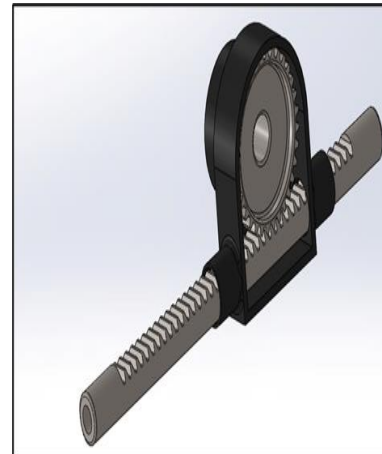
CAD design of rack and pinion (Rack and pinion is a type of steering gear that is commonly used in modern vehicles)
